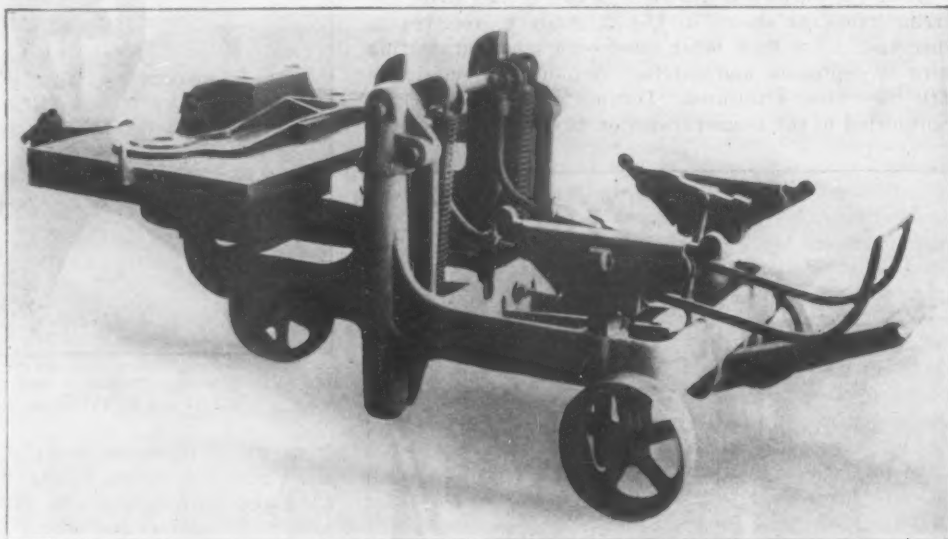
The Type R Edward A. Pridmore Turn-Over Machine with 14-in. Draw.
